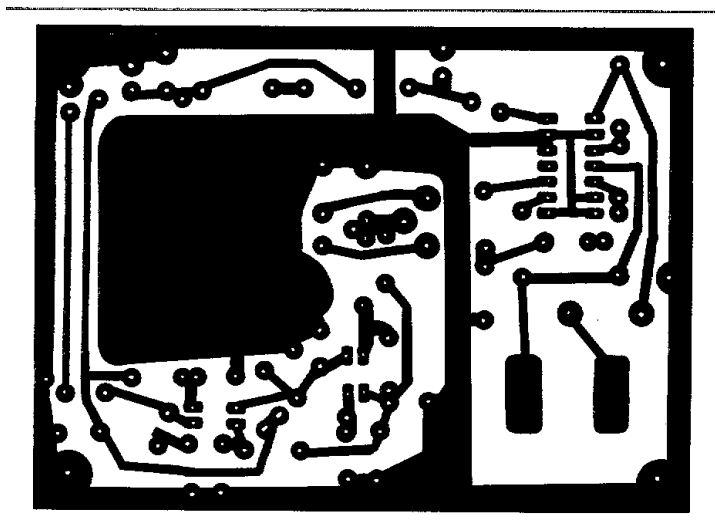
Circuit-board etching pattern for the general-coverage receiving adapter (see the parts layout of Fig. 2). Black represents copper. The pattern is shown at actual size from the foil side of the circuit board.
